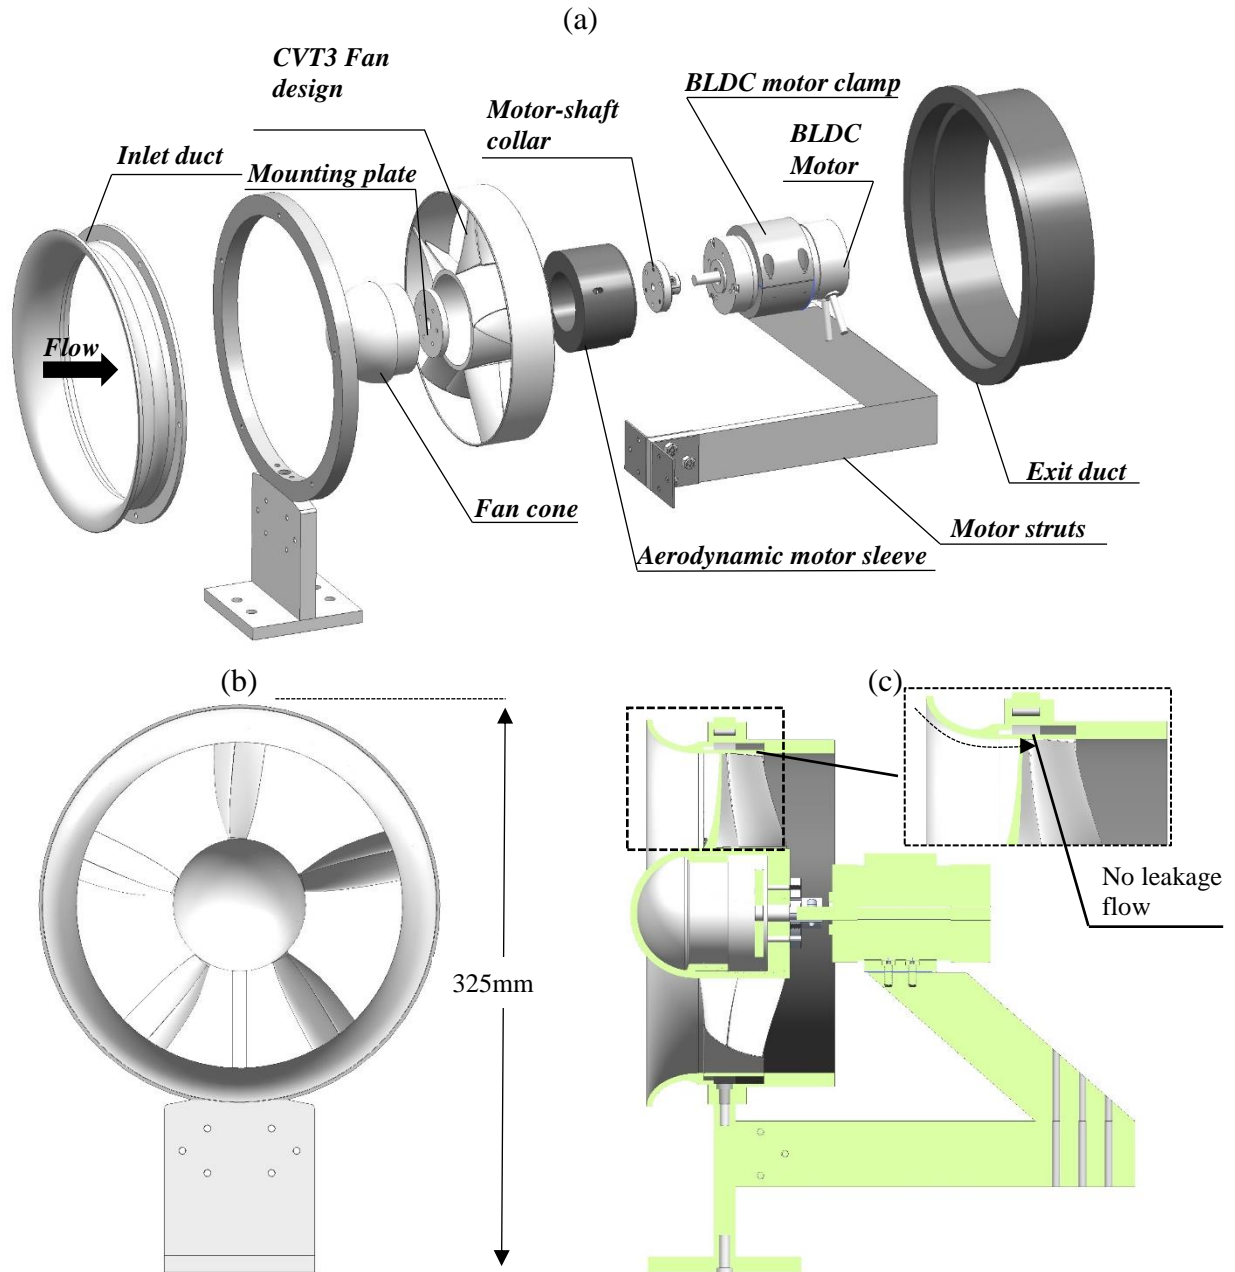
Fan test rig (a) exploded view showing the components of the test rig. Front view (b) shows the motor strut results in small flow blockage. Lastly (c) shows the cross section view of the test rig and the method for eliminating the tip leakage vortex.
